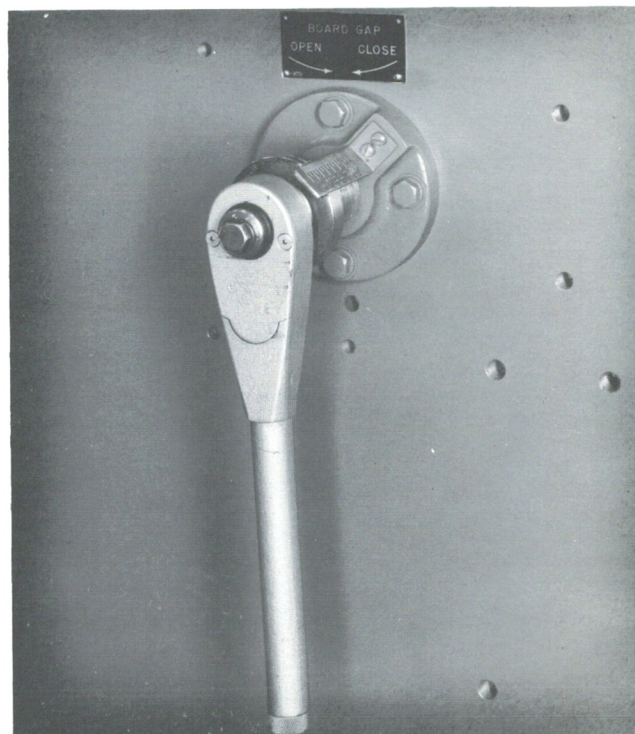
FOLDING SECTION FEED END CALIPER ADJUSTMENT HANDLE
